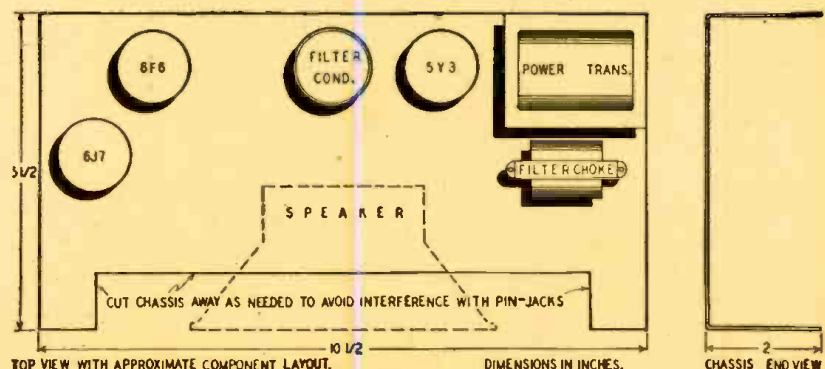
Top view, showing components layout, cutaway for speaker and dimensions of chassis.
